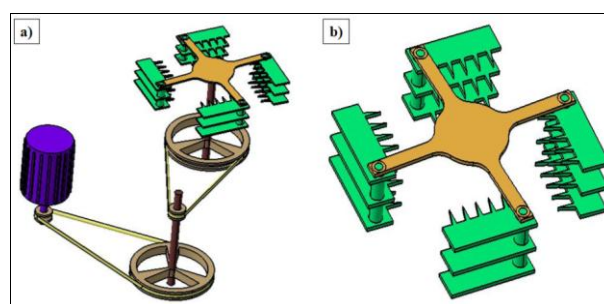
(a) Power transmission in machine, (b) Rotor attached with blade
